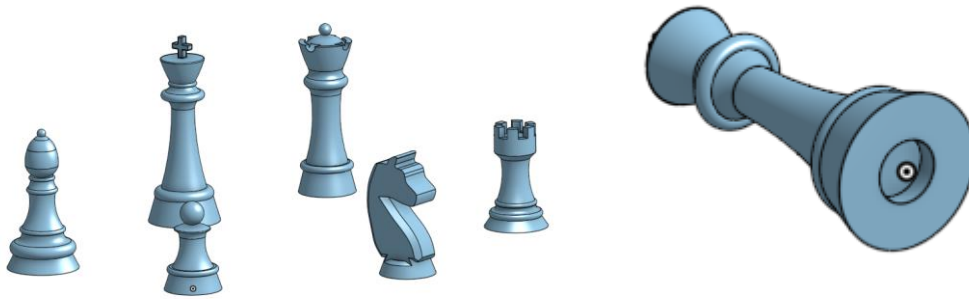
CAD of chess pieces (left) and the hole at the bottom of the piece (right)
